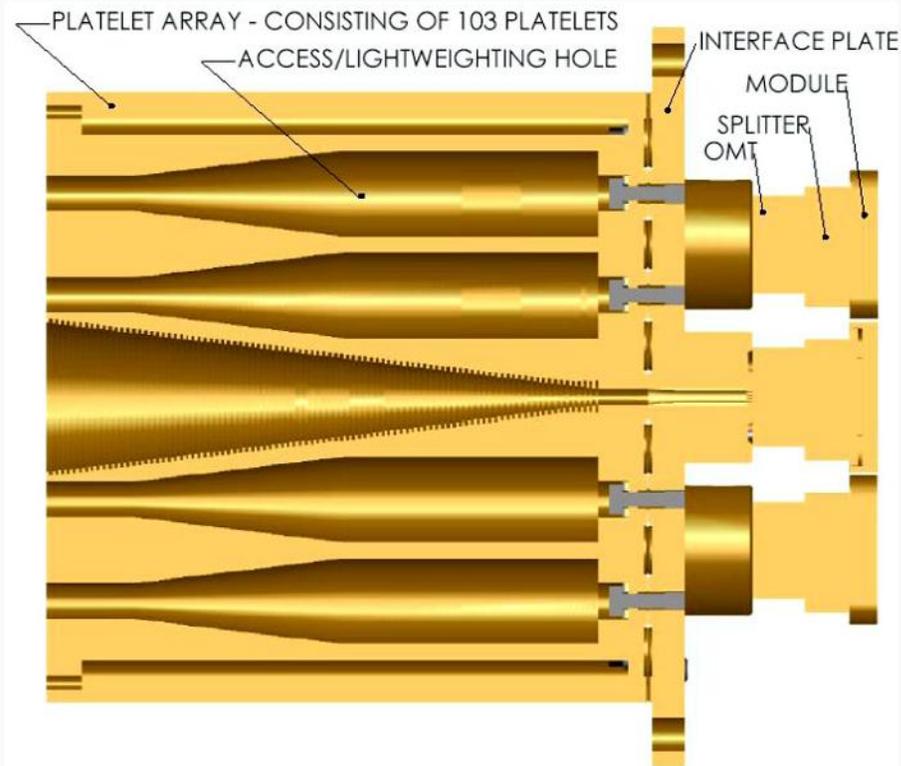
Detector detail. The Module Array Boards are not shown, but would attach directly to the module (right hand side of figure).
